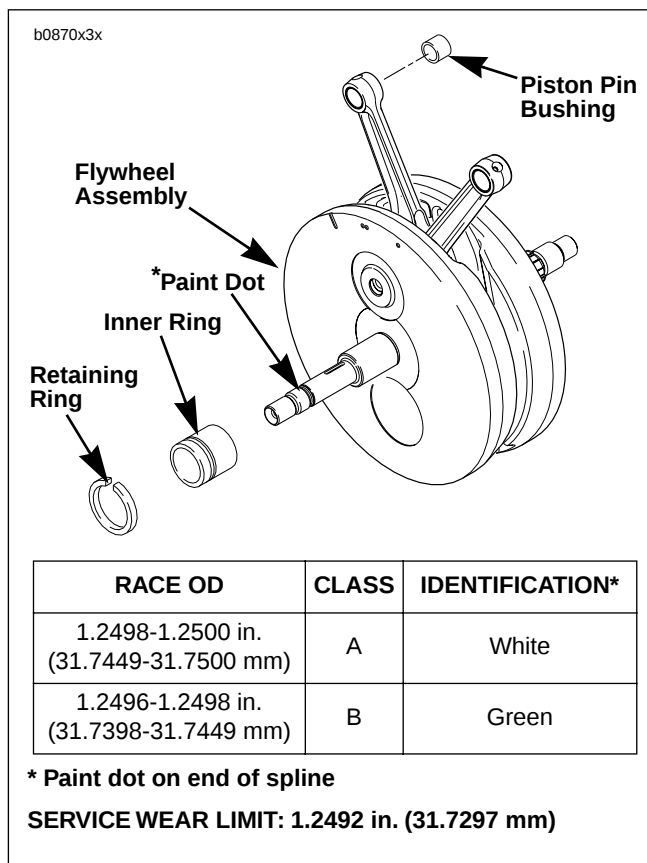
Low Inertia Flywheel and Connecting Rod Assembly/Factory Inner Race Sizes
